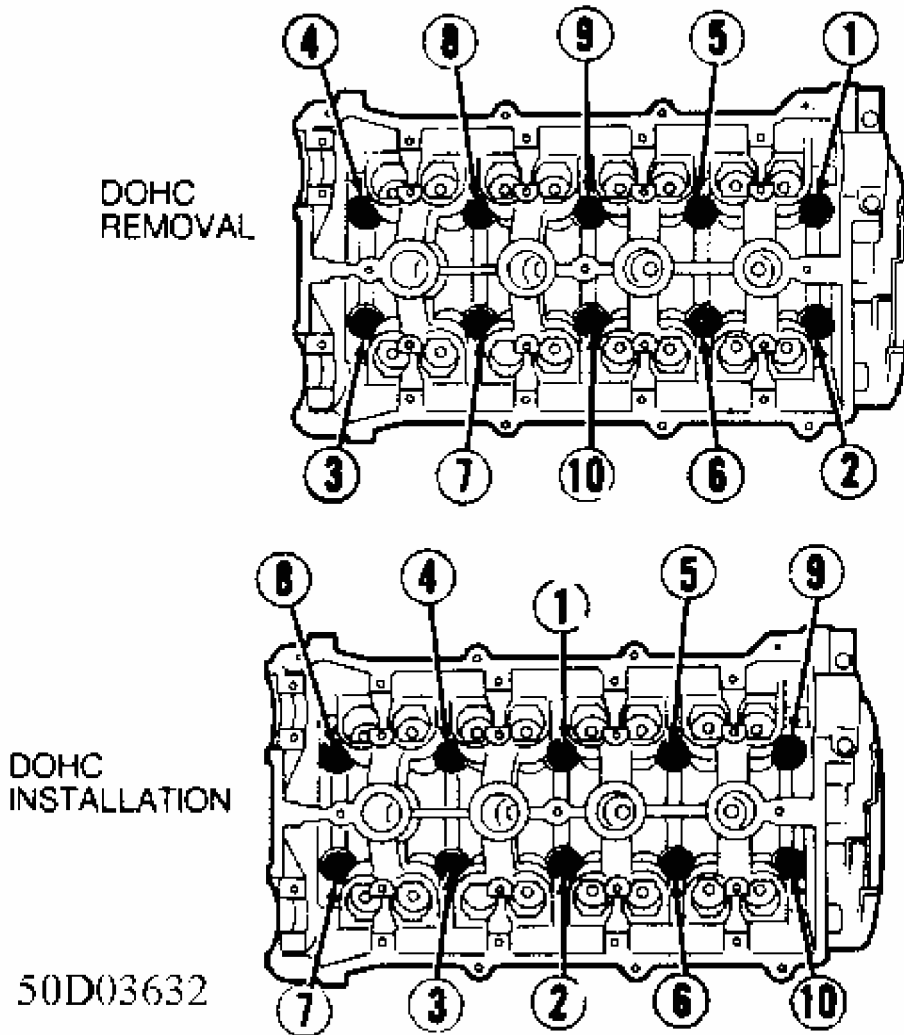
Cylinder Head Bolt Removal & Installation Sequence
